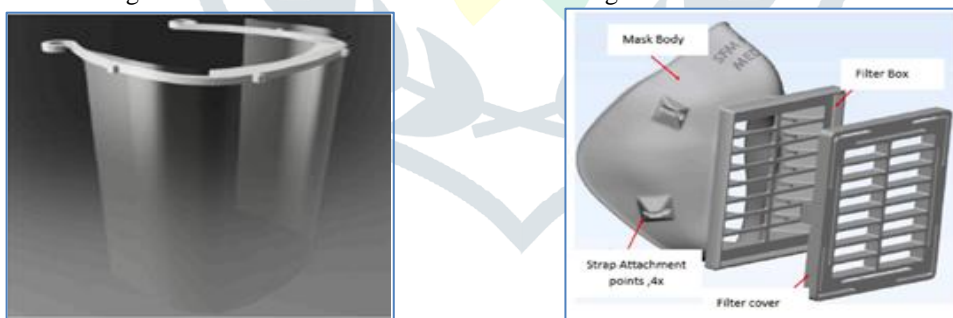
depicts 3D Printable (a) Face shield and (b) Stopgap Face Mask
